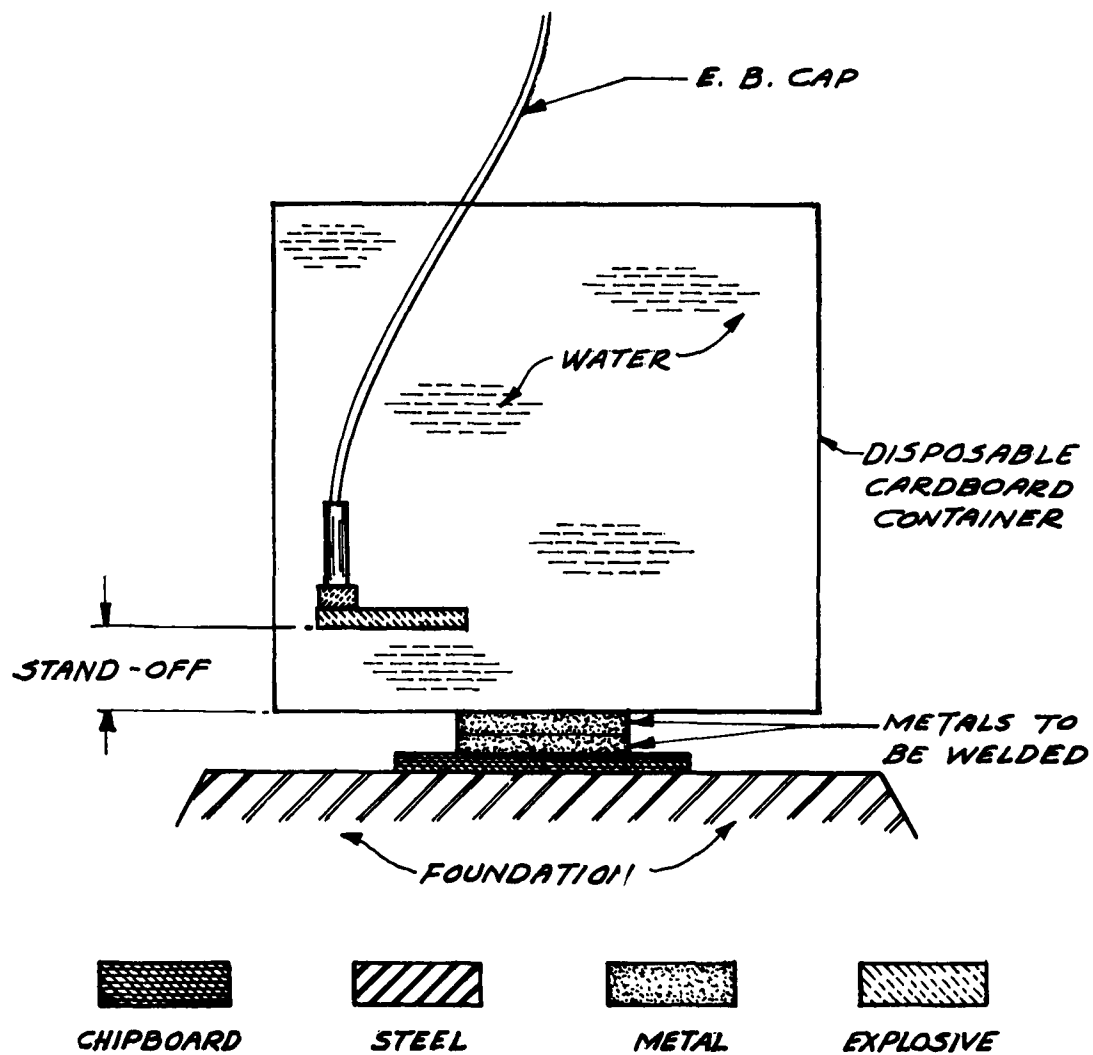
END INITIATION FOR EXPLOSIVE WELDING.
